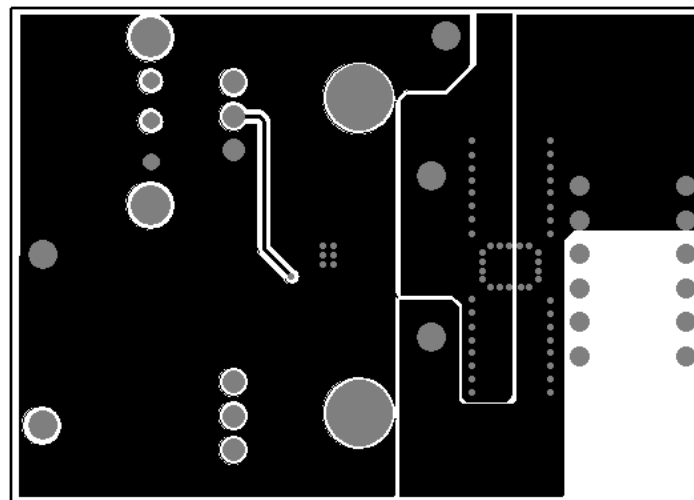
SP7685EB PC LAYOUT BOTTOM SIDE
